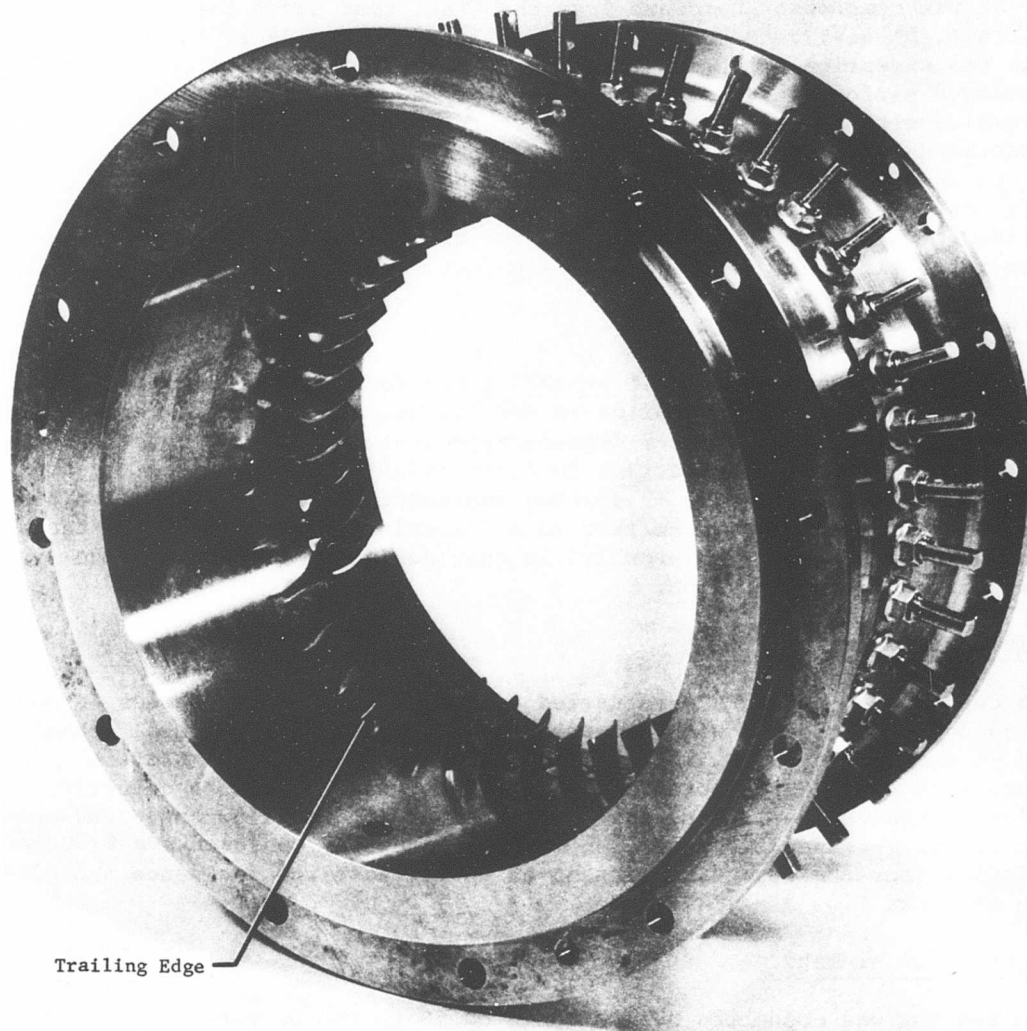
Redesigned Exit Stator and Outer Housing Assembly, Rear View.
